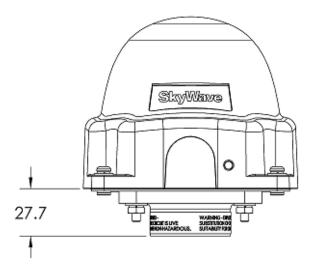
IDP-690 CID2 Side View Enclosure Dimensions (mm)
